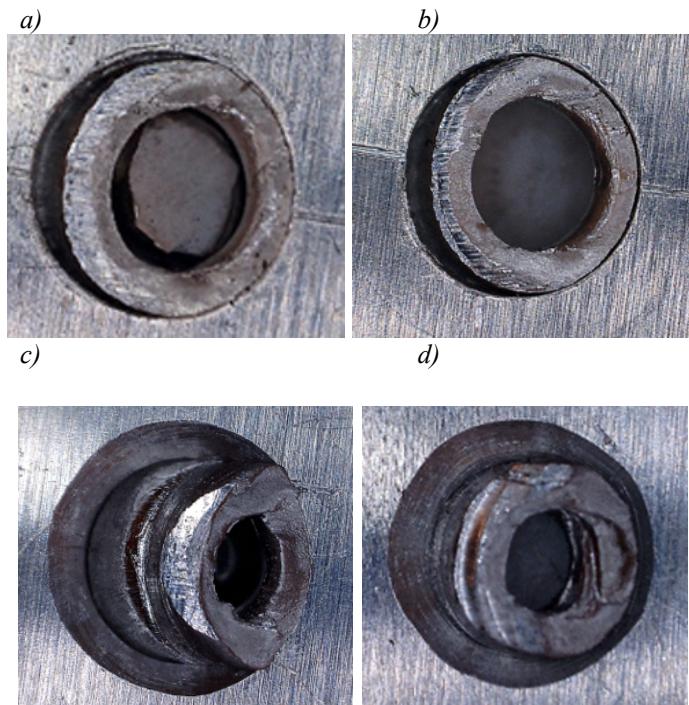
View of damaged rivet in joint with 0 mm (a, b) and 0.7 mm chamfer (c, d)
